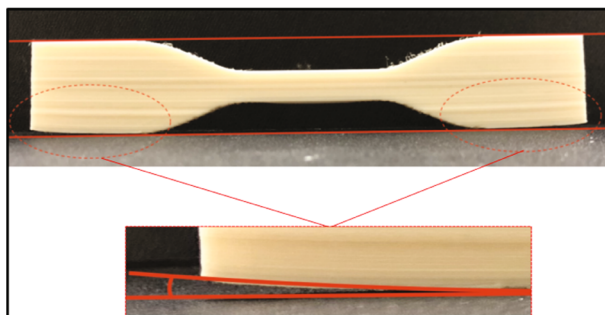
The measurement of warpage angle of 3D-printed dumbbell-shaped specimens.
